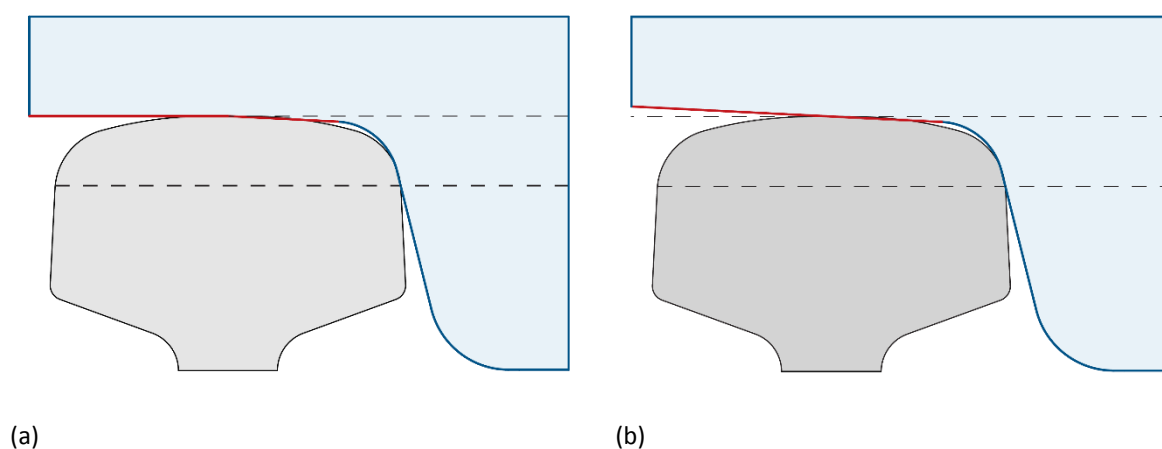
Planner used to cut the back groove of the FC crossing
